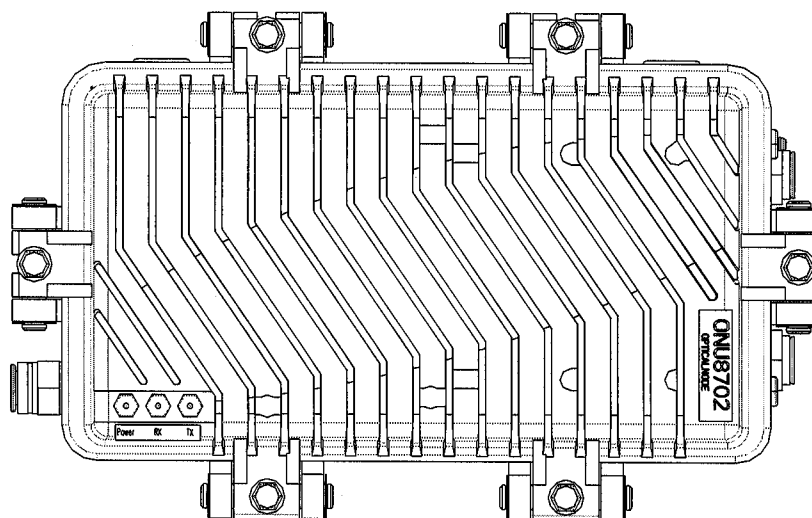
Rear view of housing, strand clamps, and pedestal mounting holes
